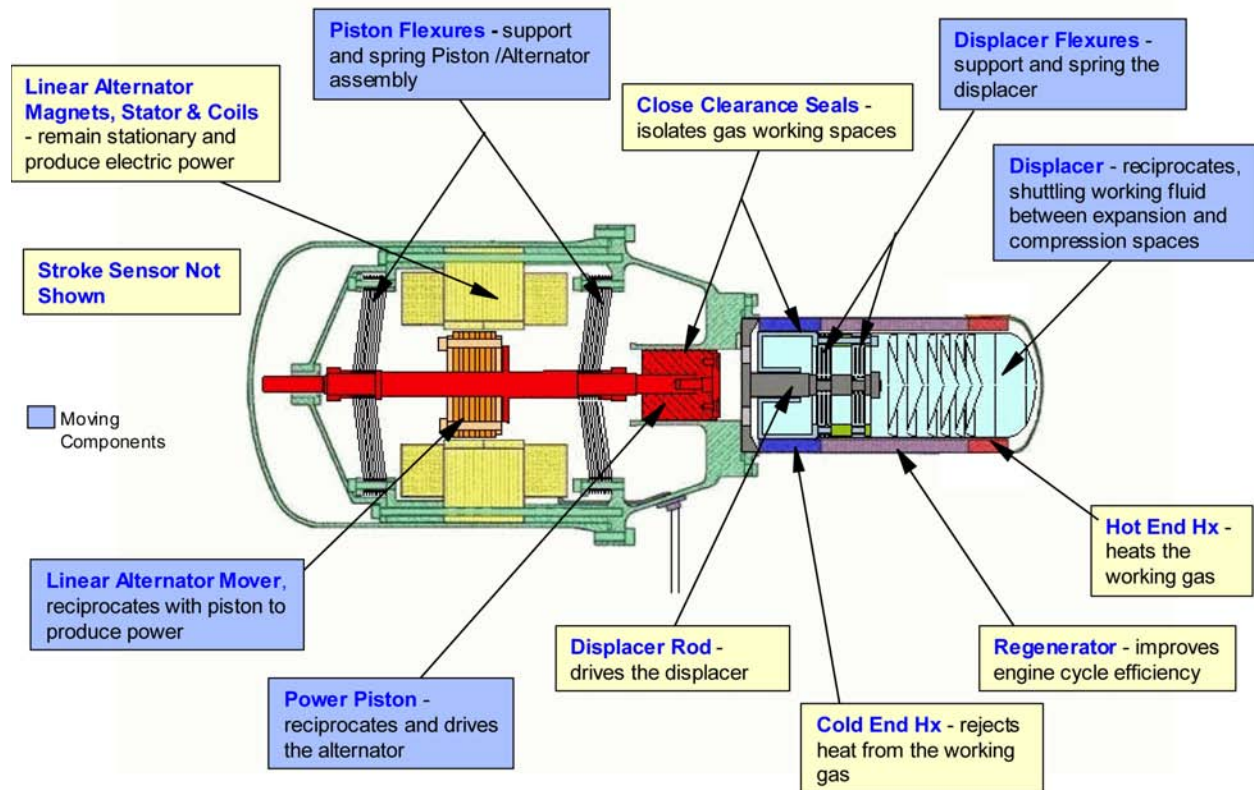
Cutaway of Stirling Converter Integrated with a Linear Alternator in a Hermetically Sealed Pressure Vessel
